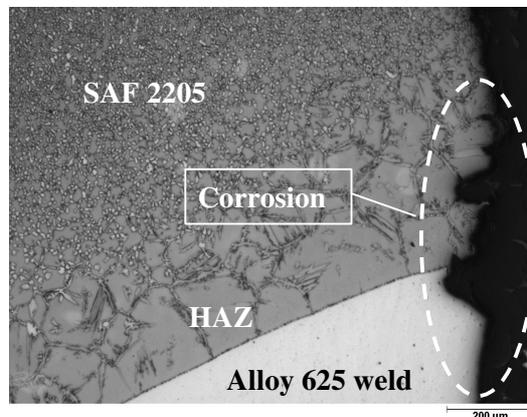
Duplex 2205 welded with Alloy 625 filler material showing local corrosion attacks in the transition zone between base material and weld.
